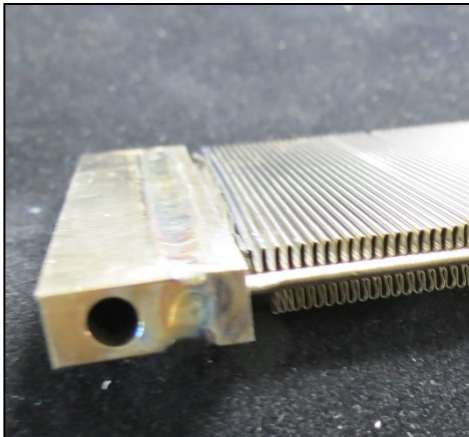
Full cell and manifold assembly, showing the welded 2-piece manifold assembly (left) with its mated brazed cell (right).
